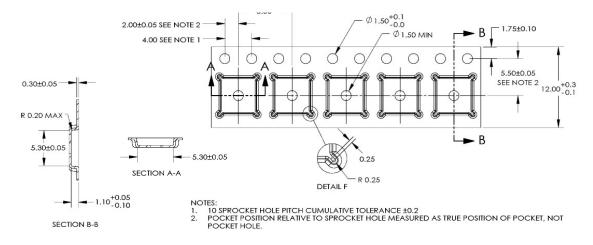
QFN24L (5x5 mm) carrier tape outline (dimensions are in mm)
